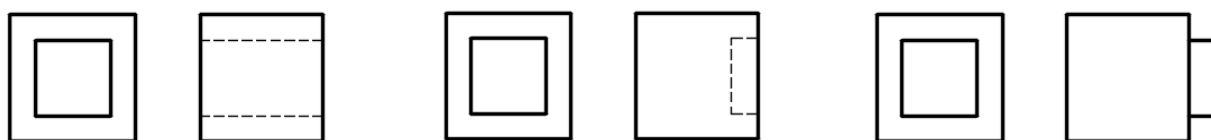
Complete drawings for the parts presented in Figure 5, b - two projections: main view and left-hand view
